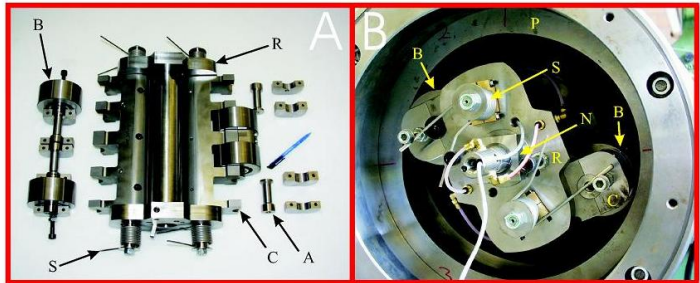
CBCP construction: (a) exploded view of the CBCP parts; (b) CBCP after mounting on the extended camshaft, and addition of the internal cams. (A) additional mass; (B) roller follower; (C) coupler; (N) nut; (P) internal cam; (R) rotor; (S) spring.
